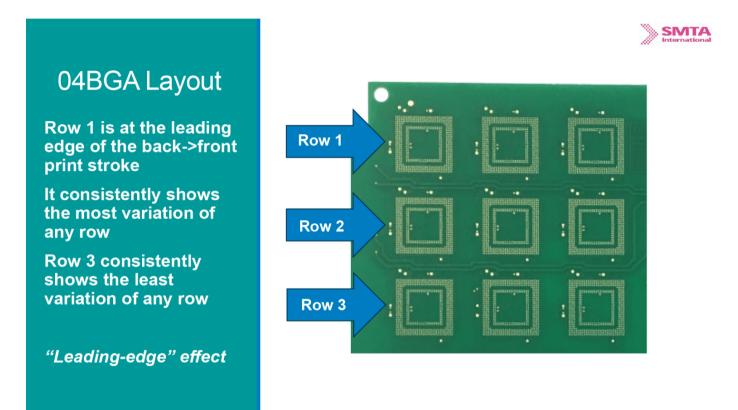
Close up of the layout of 0.4mm BGA on SMTA board.
